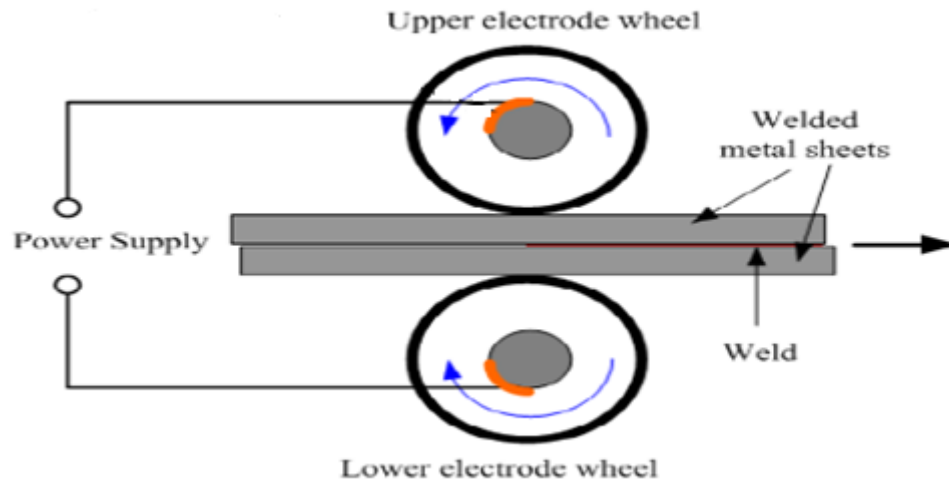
working of seam welding (<http://www.substech.com>) Accessed on 27th December, 2020
